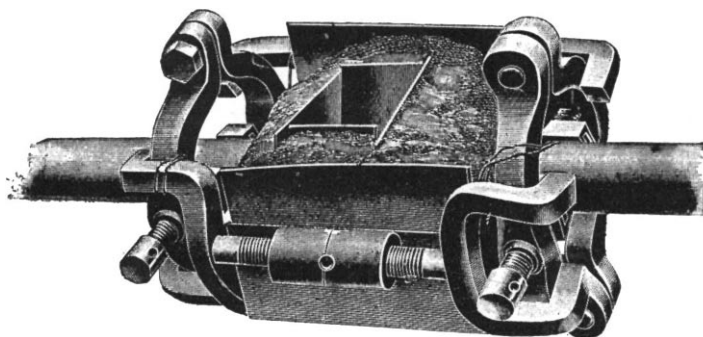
Casing packed round with moulding sand in readiness for the welding operation.
